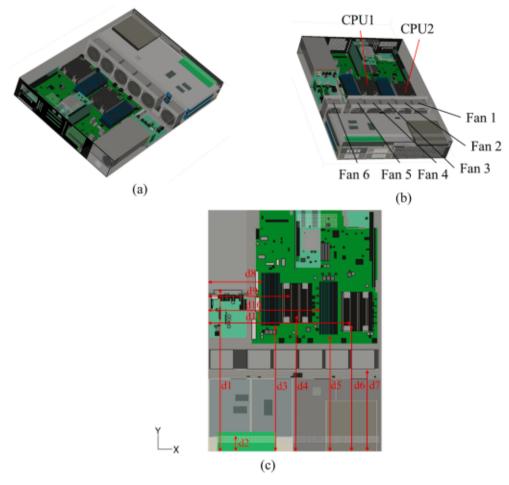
CAD drawing of the IT equipment investigated in this study.
